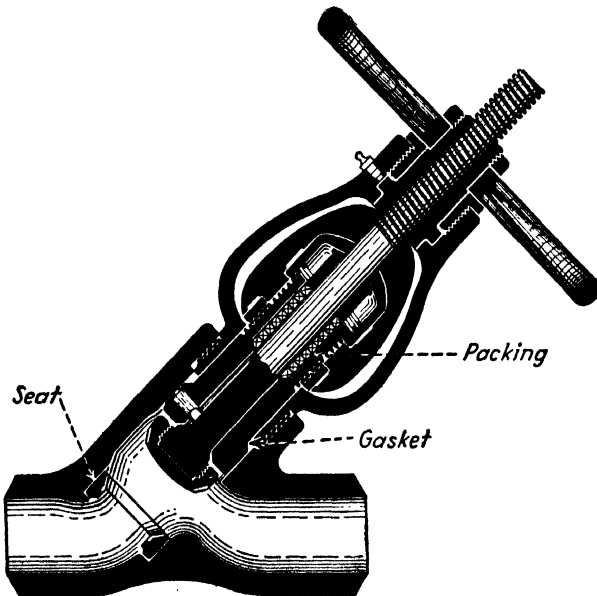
Pressure-seal bonnet-globe valve with rising stem. (Courtesy of Crane Co.)
